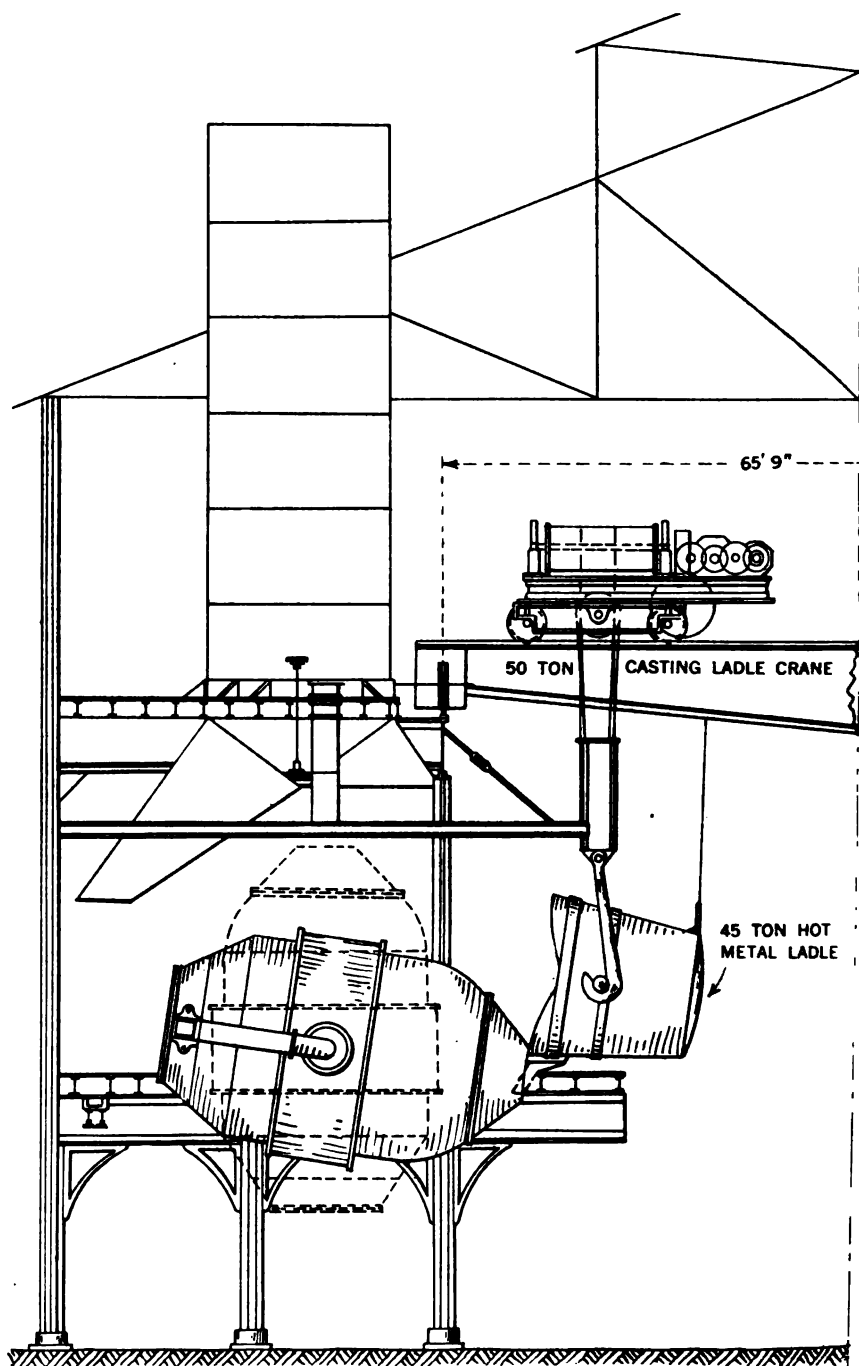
PART SECTION OF FIG. 1, SHOWING METHOD OF CHARGING THE CONVERTERS.
